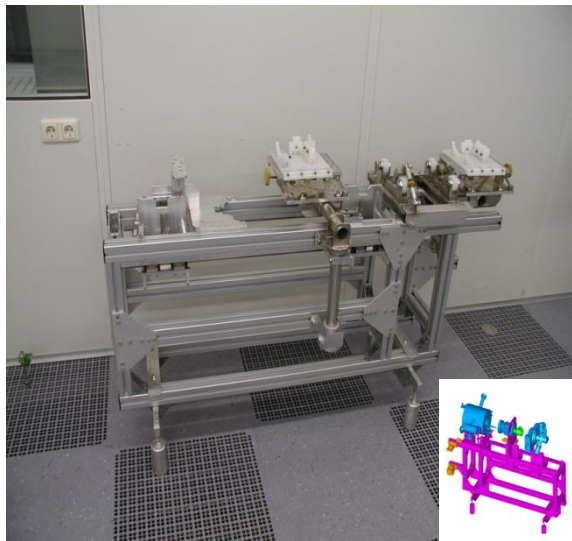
Alignment and assembly tool for the BPM, Quadrupoles and Gate valve assembly in ISO 4 cleanroom.
